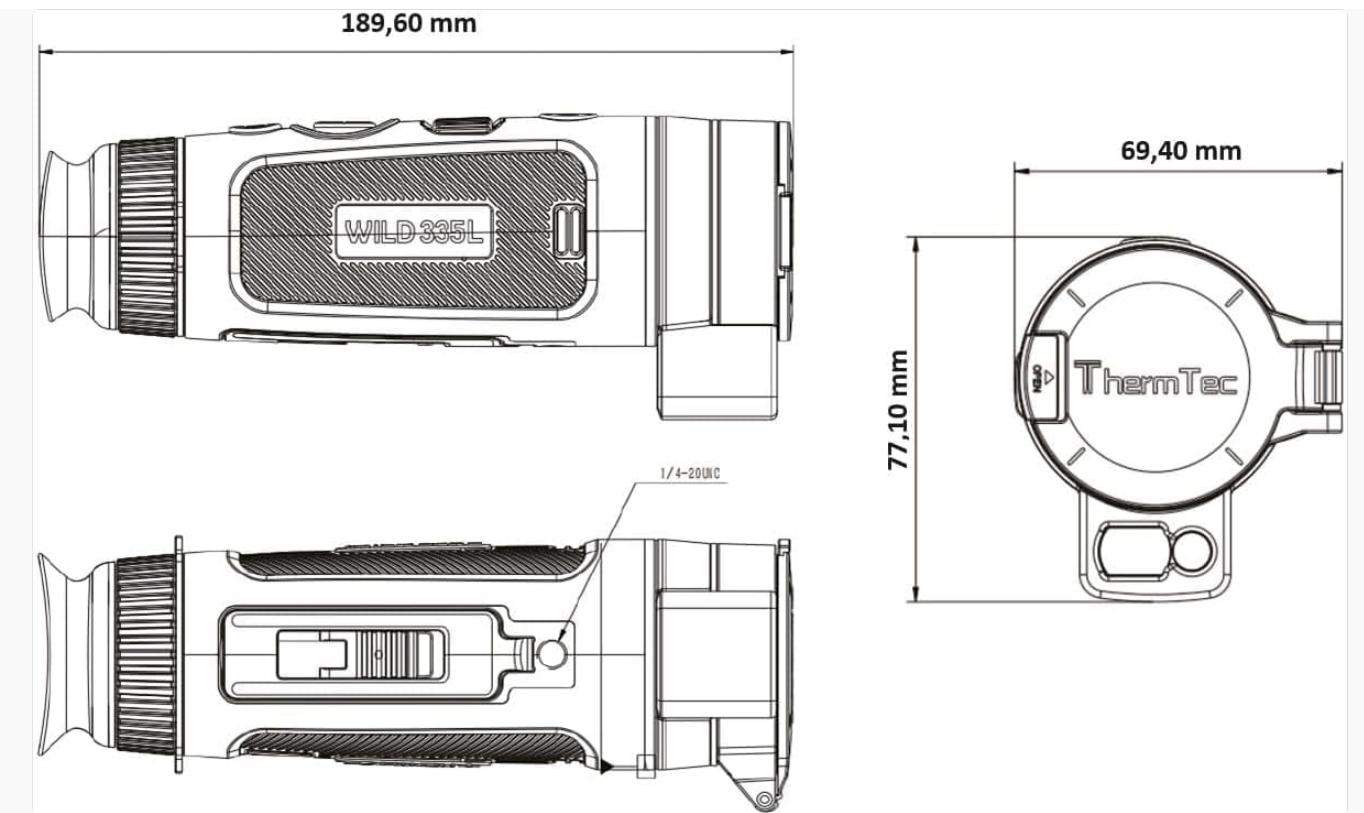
Dimensions diagram of the ThermTec Wild 335L. This technical drawing provides precise measurements of the device's length, width, and height.
